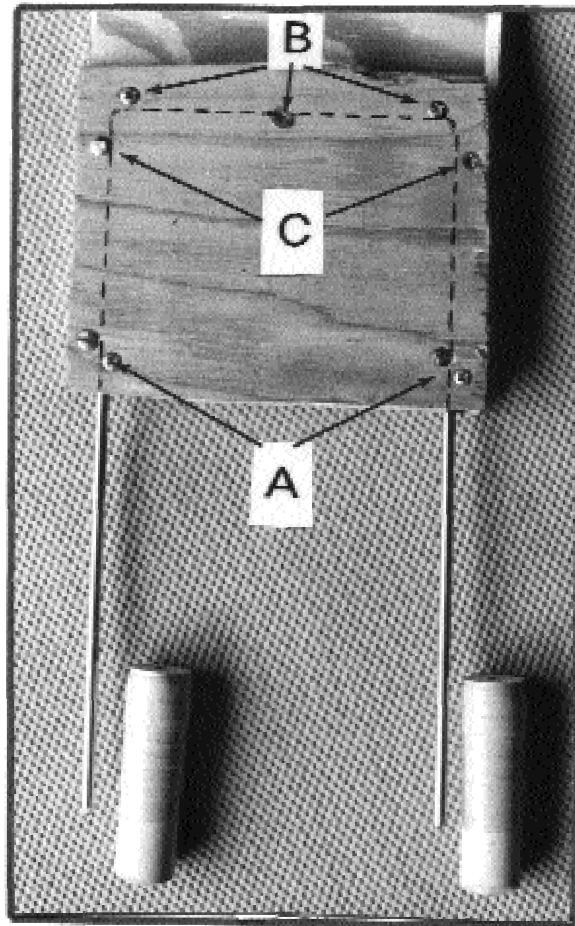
Spikes in the bottom of the board are pushed into the ground to hold the board upright. Use a 3/16-in diameter steel rod about 30 in long. Bend it into a U-shape as shown by the dotted line. It is placed under a plywood plate and held in place by nine screws. Leave about 6 in (1.5 dm) of rod below the board. Screws are positioned to hold the rod in place. (A) Insert a screw on each side of the rod at the bottom. (B) Insert three at the top to prevent upward and downward movement of the rod. (C) Place one at each side at top to prevent sideways movement. Drill out doweled to fit over the spikes for safety.
